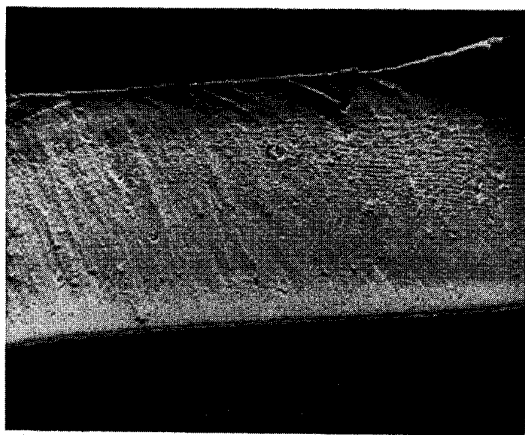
Part of the fracture surface of a coated specimen tested at  $-135^{\circ}\text{lag}$ ,  $\Delta\epsilon_m=1\%$
